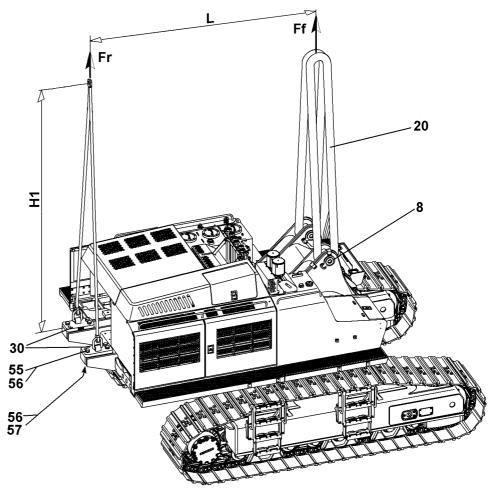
Installing the lifting tools to the basic machine R974C
